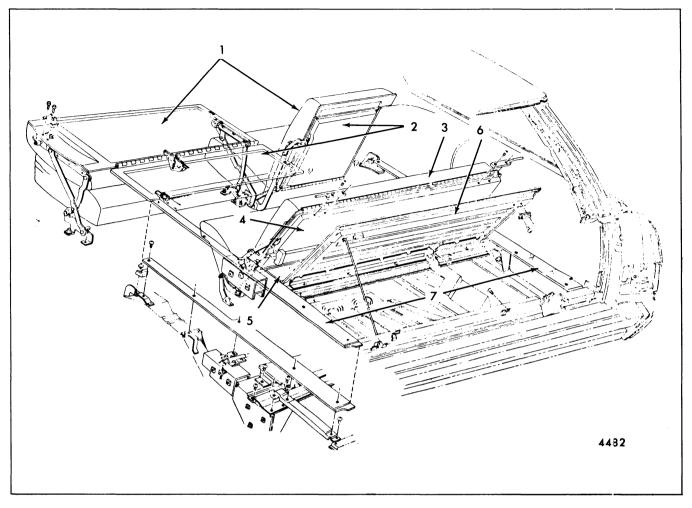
Folding Seats and Load Floor Panels - "B" Body Three-Seat Styles
